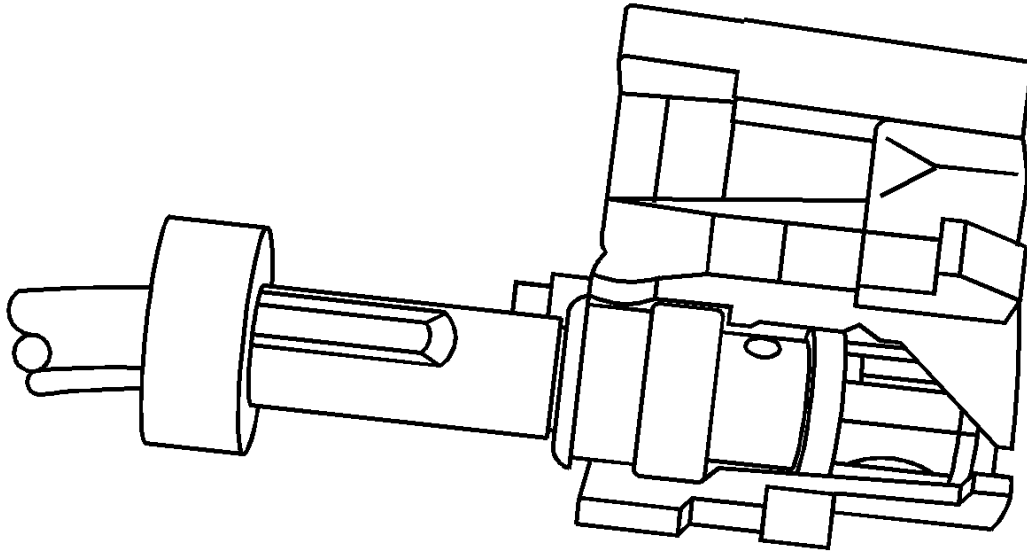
Connecting New Service Coaxial Cable To New 3-Way Connector Housing
